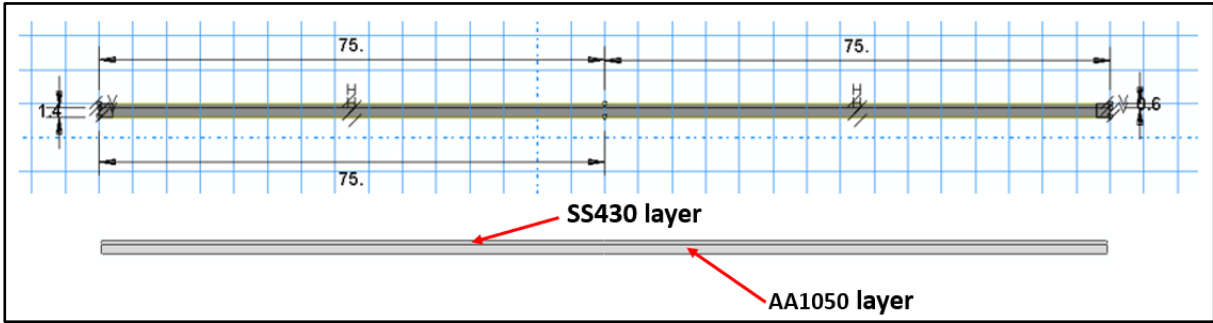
CAD model of blank of 2-ply clad sheet
